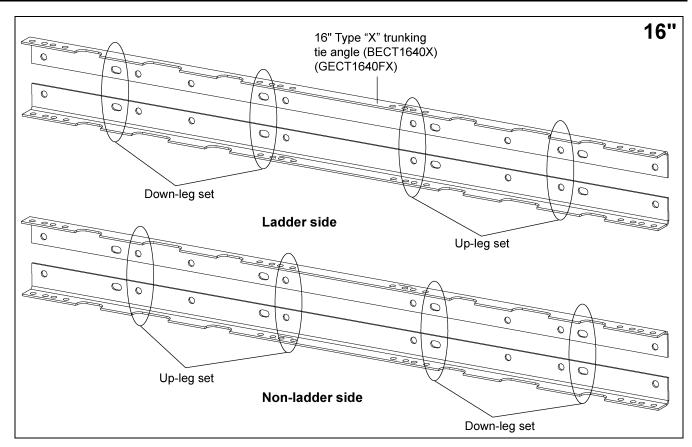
B 16" Bucket Elevator Tie Angles to Trunking Bolt Locations
